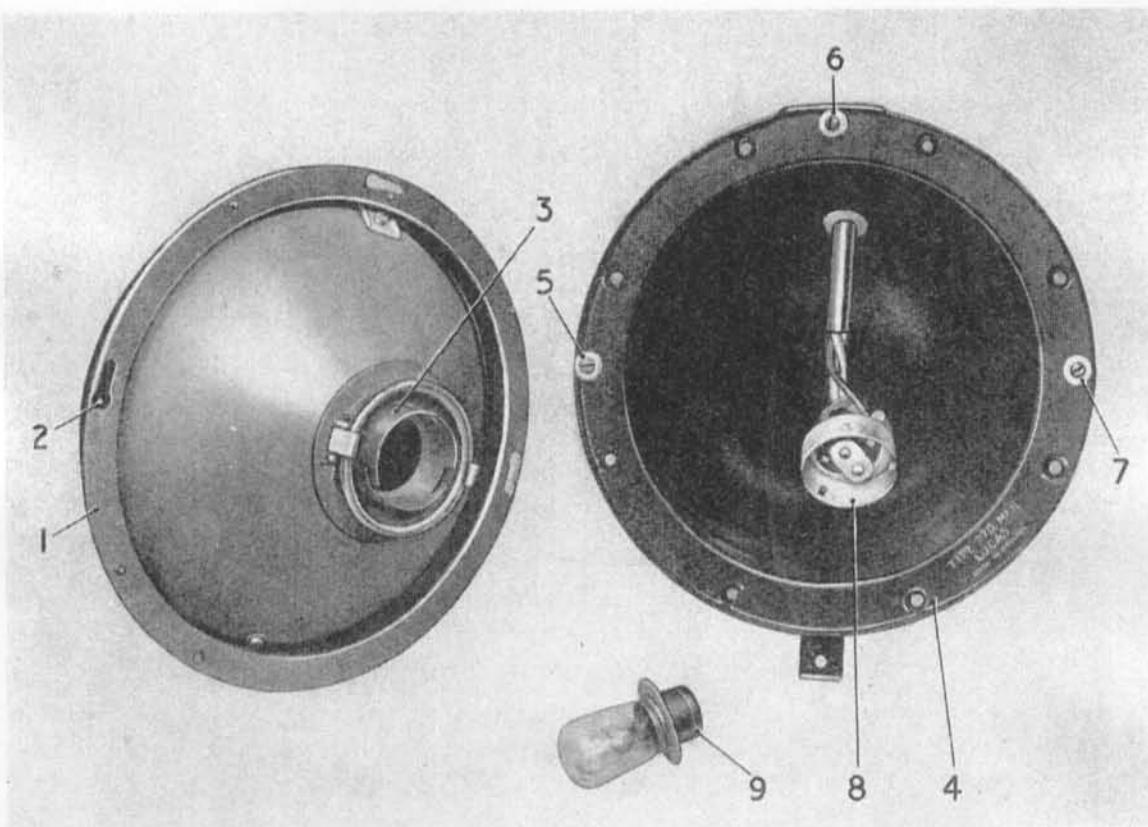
HEADLAMP—EXPLODED VIEW.
